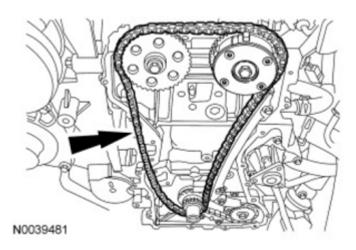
Locating Timing Chain Courtesy of FORD MOTOR CO.
